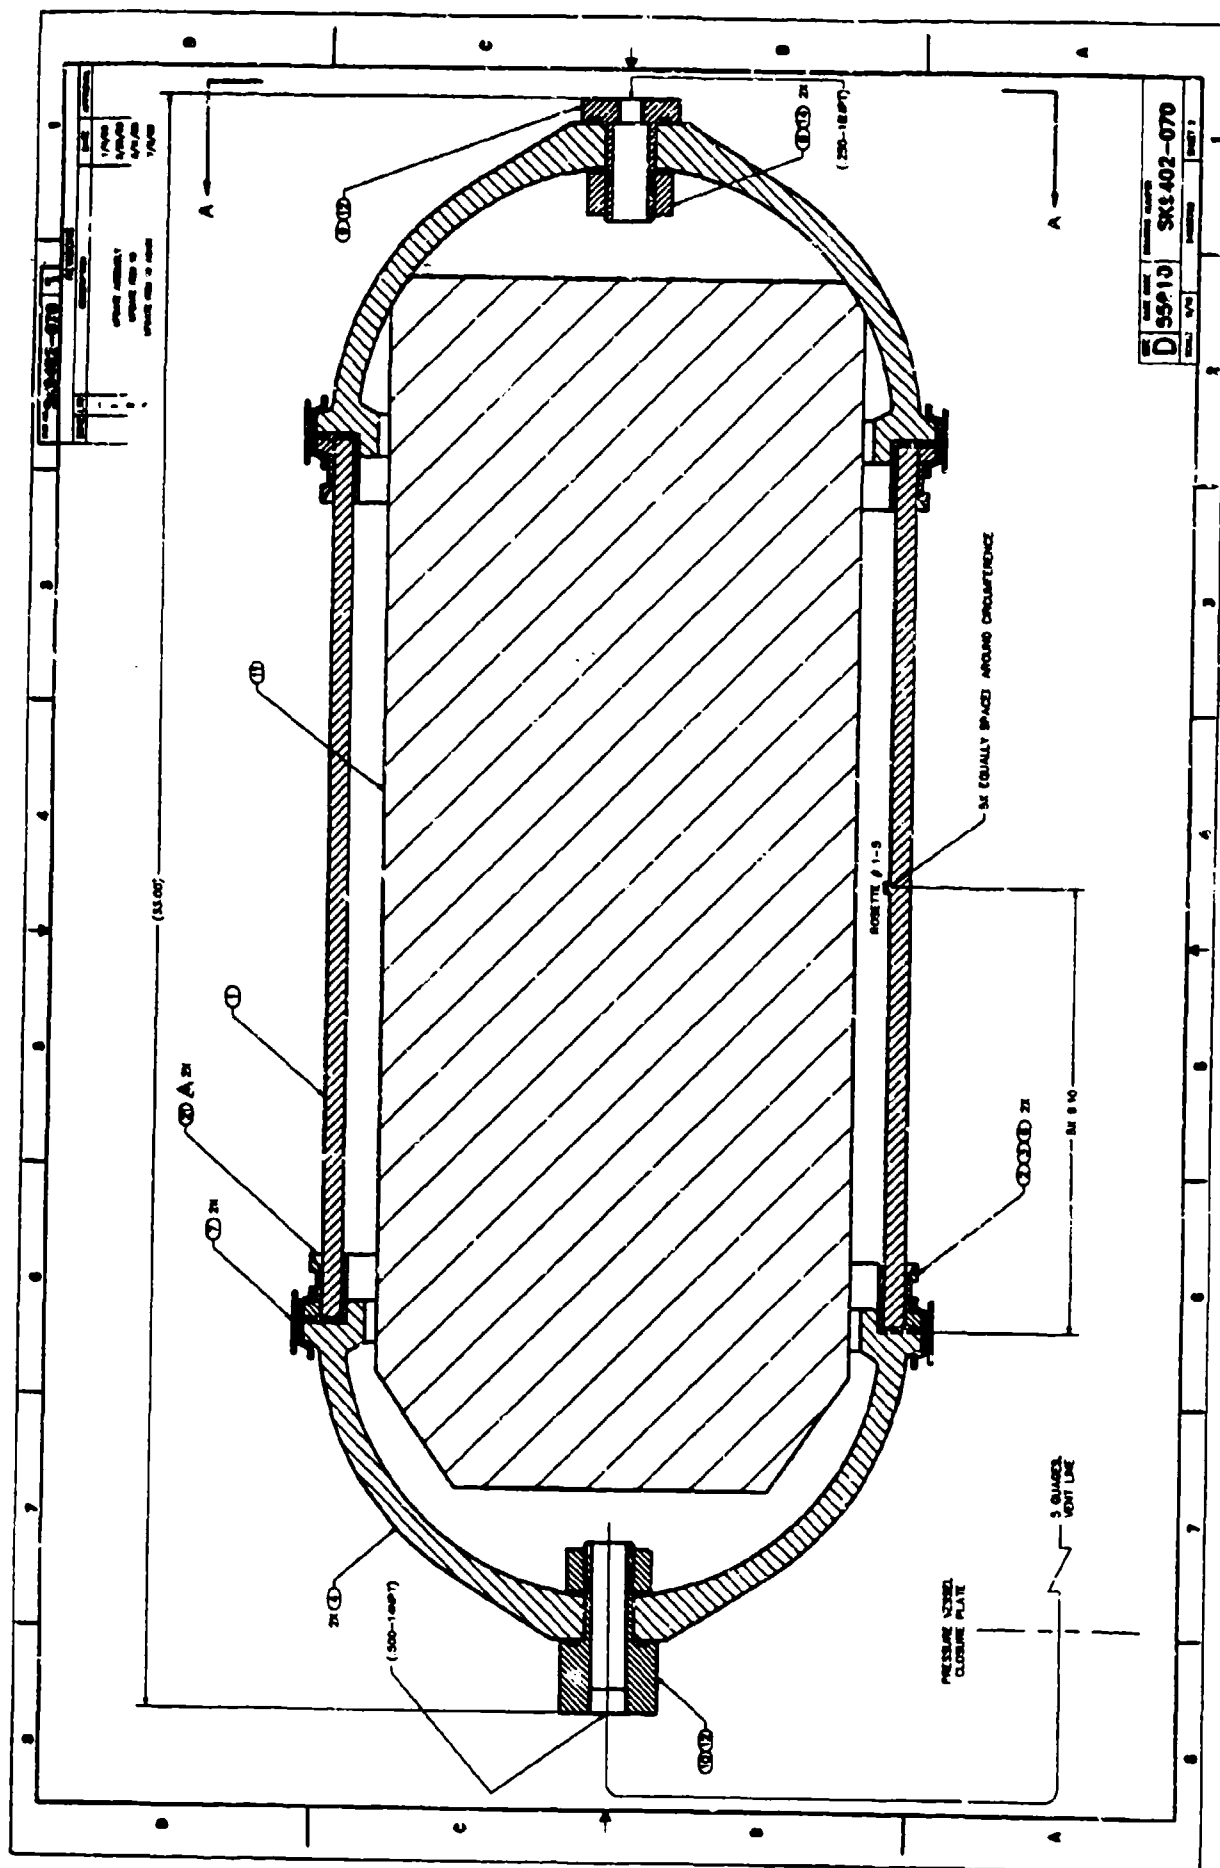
12-inch cylinder test assembly, Type 1 configuration, Sheet 1.
